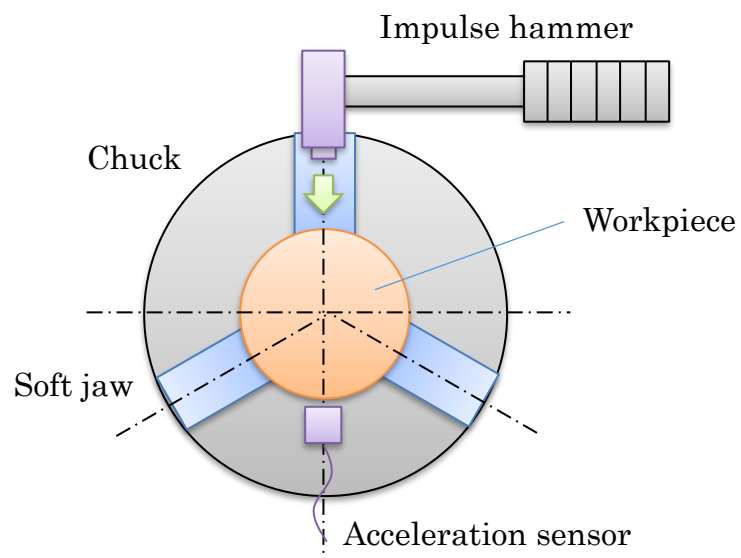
Phase of the chuck, workpiece, and acceleration sensor in the hammering test
